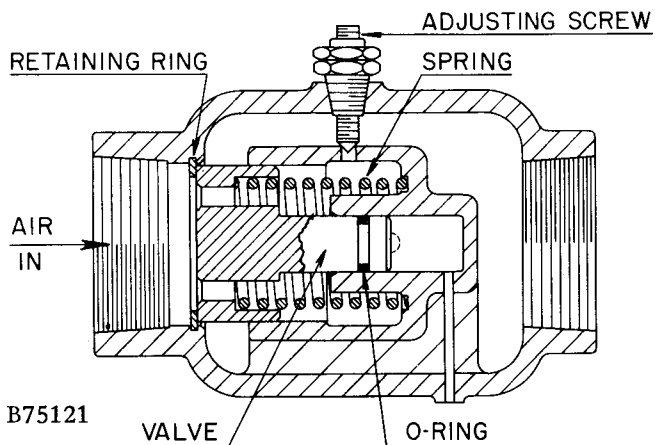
MINIMUM DISCHARGE PRESSURE VALVE
